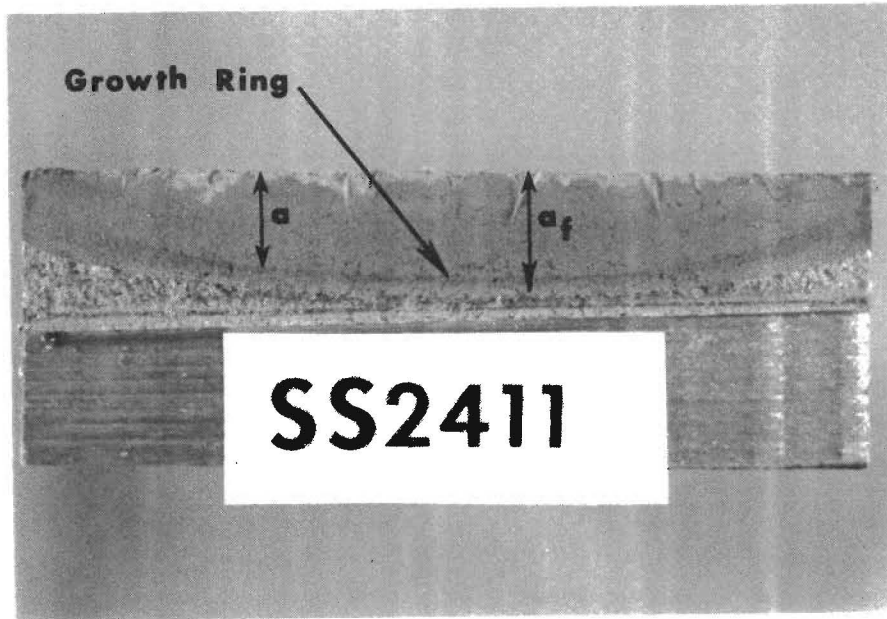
Dye penetrant indication of crack extension
